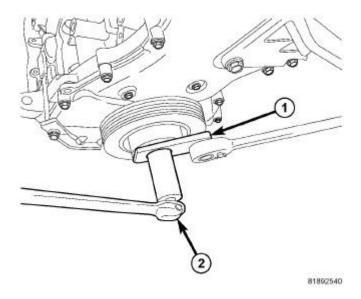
Removing/Installing Damper Bolt Courtesy of CHRYSLER GROUP, LLC
